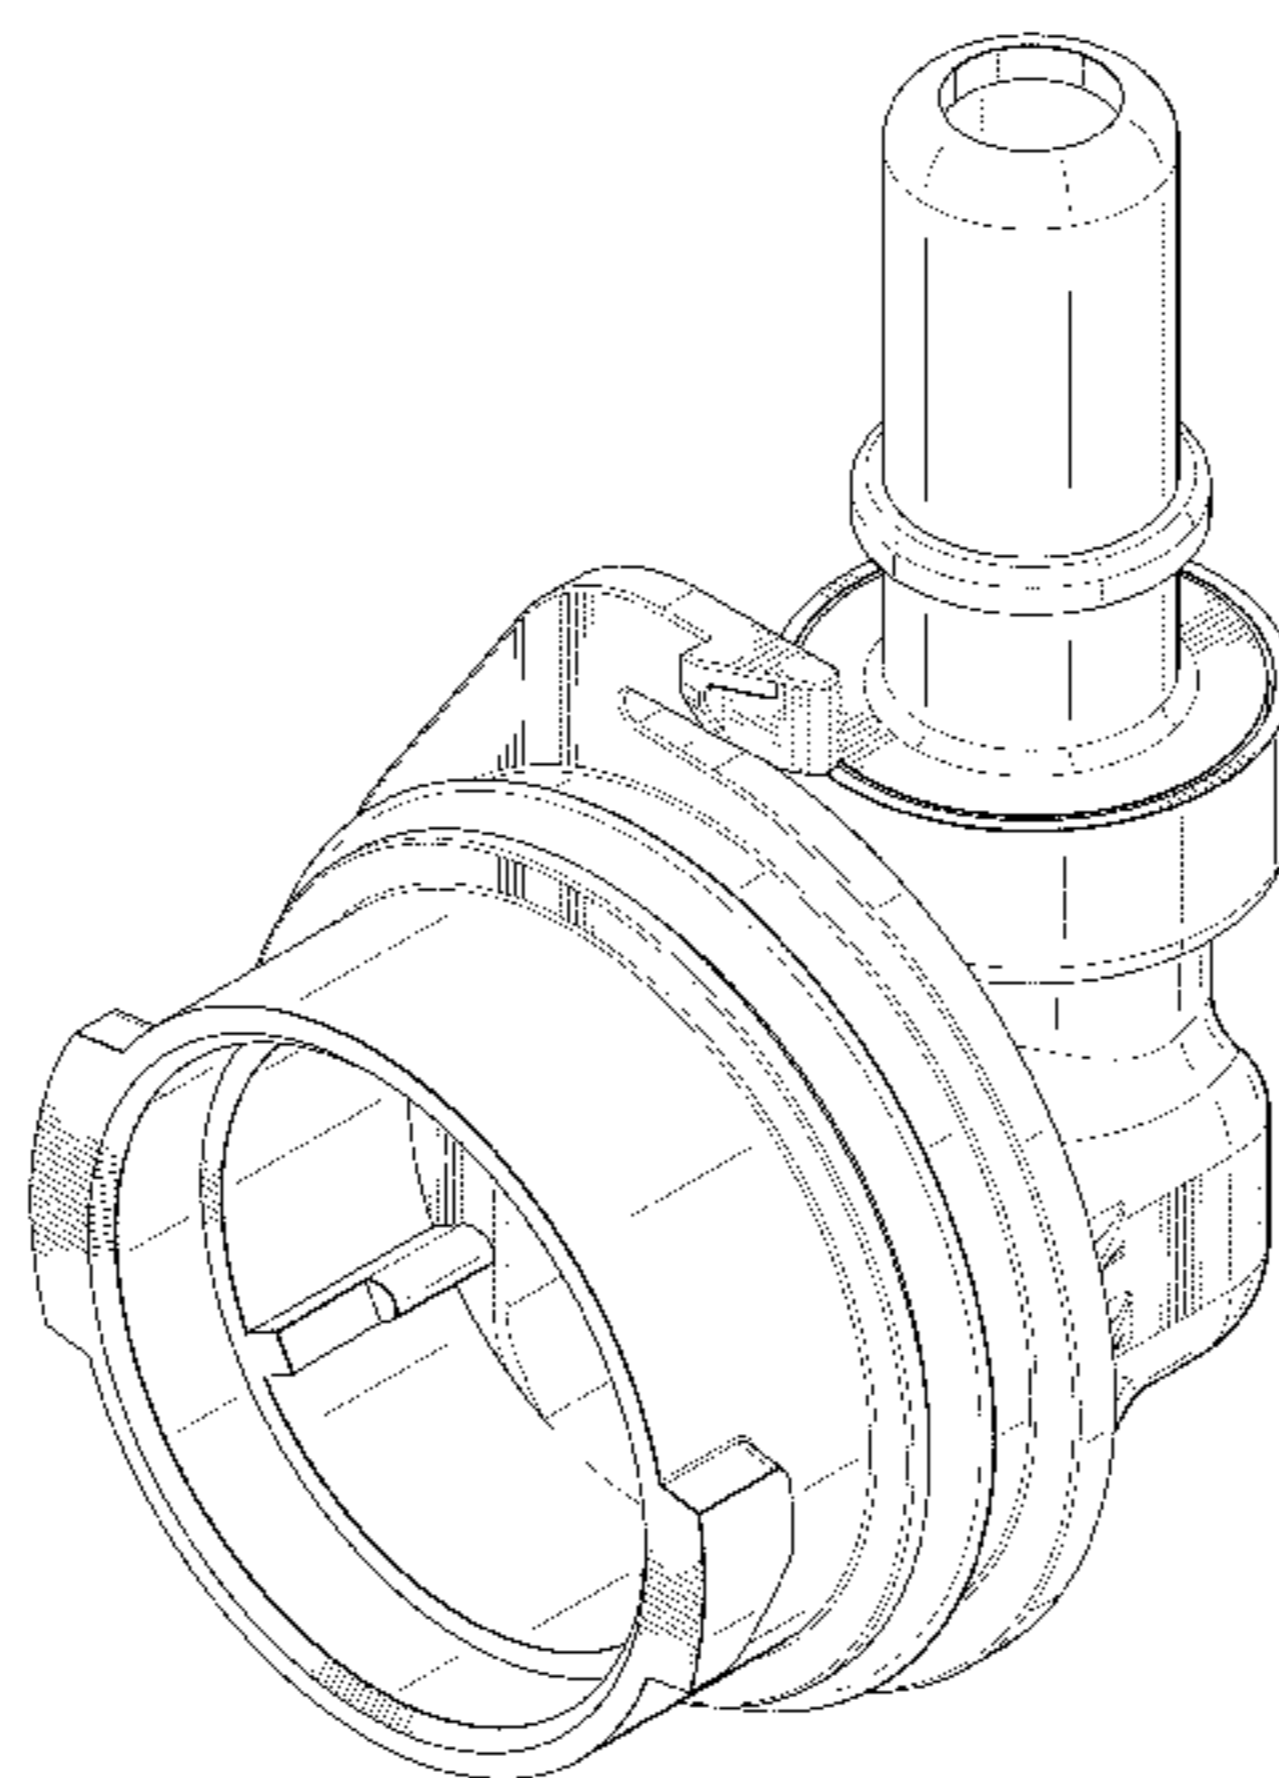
is a perspective front view of a combined positive crankcase ventilation valve and dynamic camshaft seal showing my new design;
